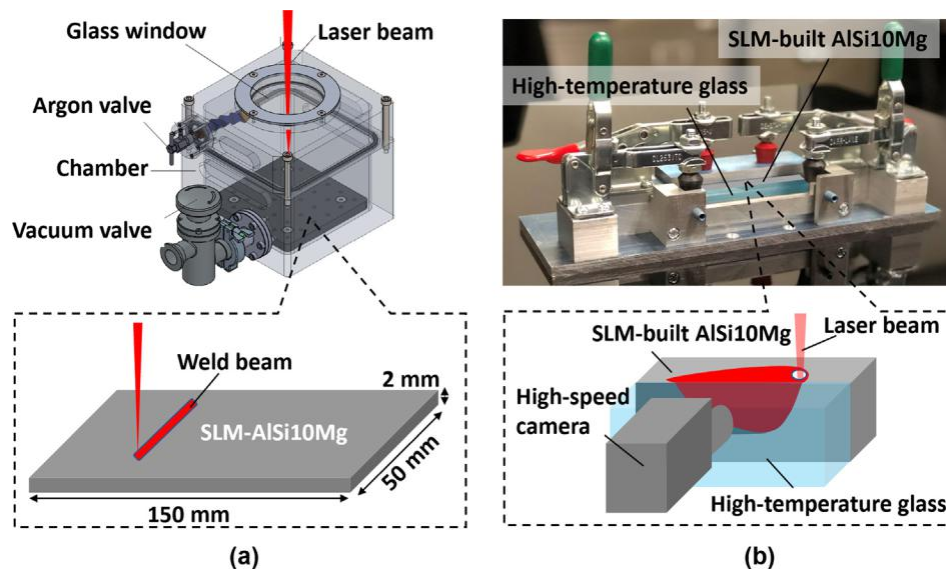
(a) Schematic diagrams of laser welding in a pressure-adjustable chamber, and (b) setup of the high-speed imaging for dynamics of porosity formation.
